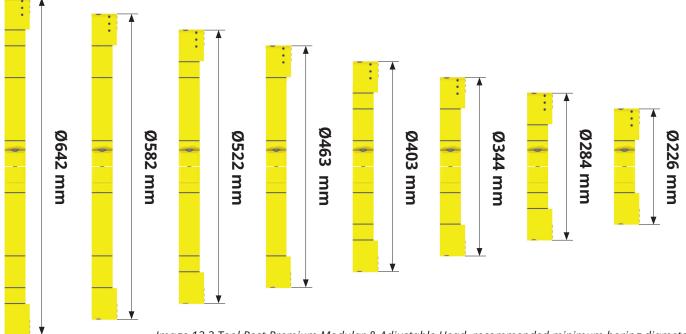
Tool Post Premium Modular & Adjustable Head, recommended minimum boring diameter
